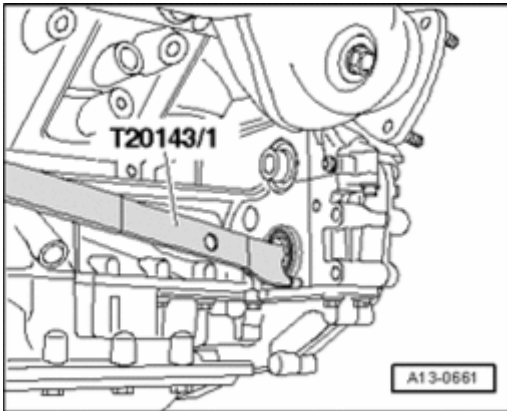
Prying Out Power-Steering Pump Drive Seal Using Pulling Hook T20143/1
